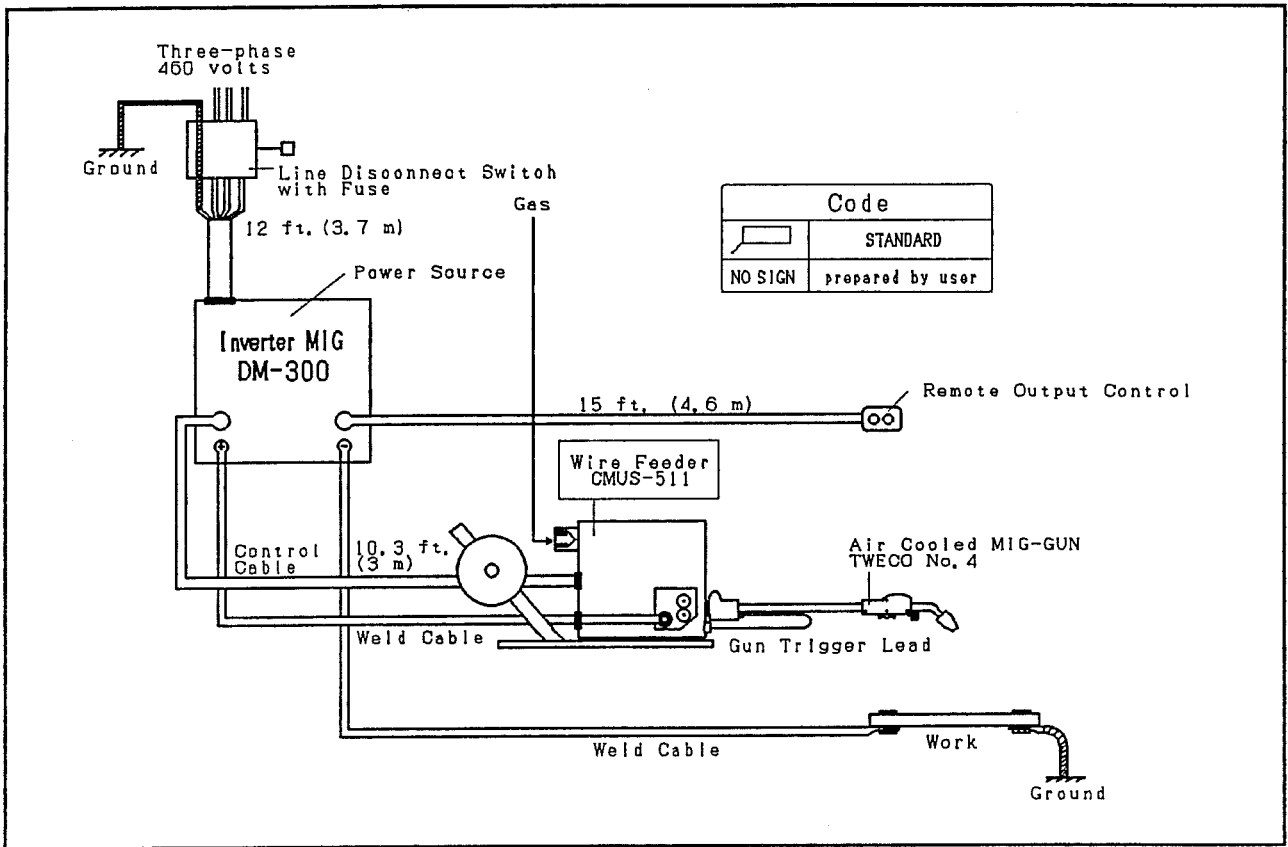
External Connection for MIG Welding with Wire Feeder CMUS-511
